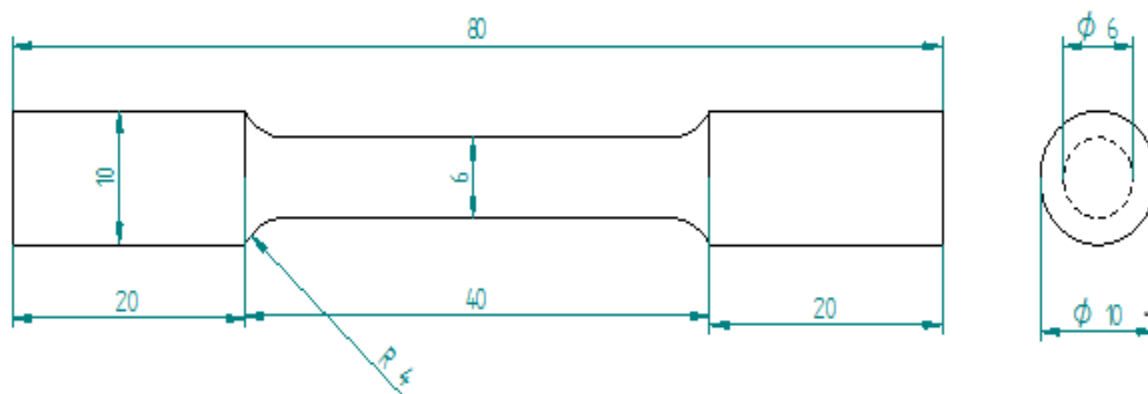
Standard Tensile Test Specimen Drawing (Dimensions are in mm)
